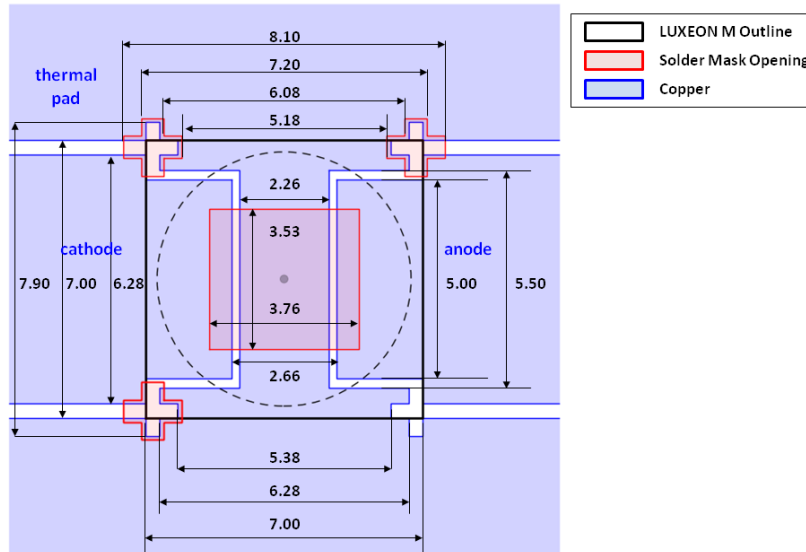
Recommended LUXEON M footprint design for Metal Core PCB. All dimensions in mm.
